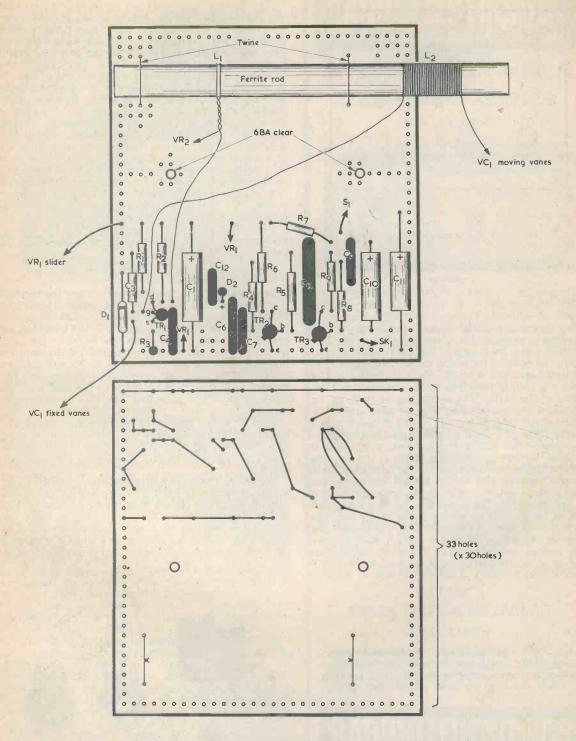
The two sides of the perforated components panel. The lead to VR1 from the bottom row of holes in the upper view picks up the negative supply rail connection at the front panel
